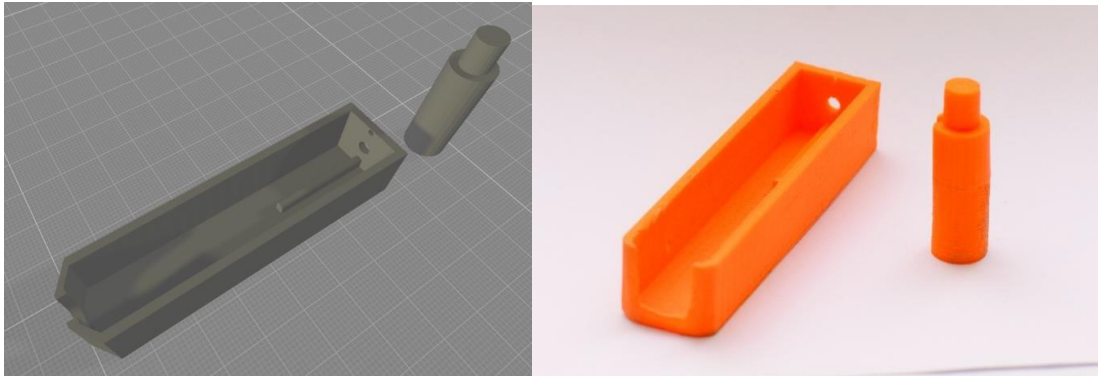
CAD Design (LEFT)– 3D Printed parts (RIGHT)
